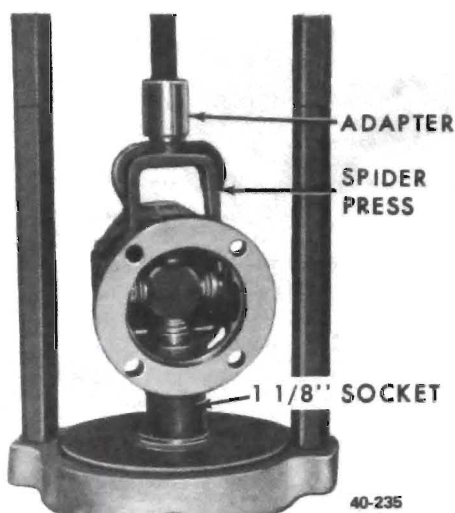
Disassembling Rear CV Rear U-Joint
